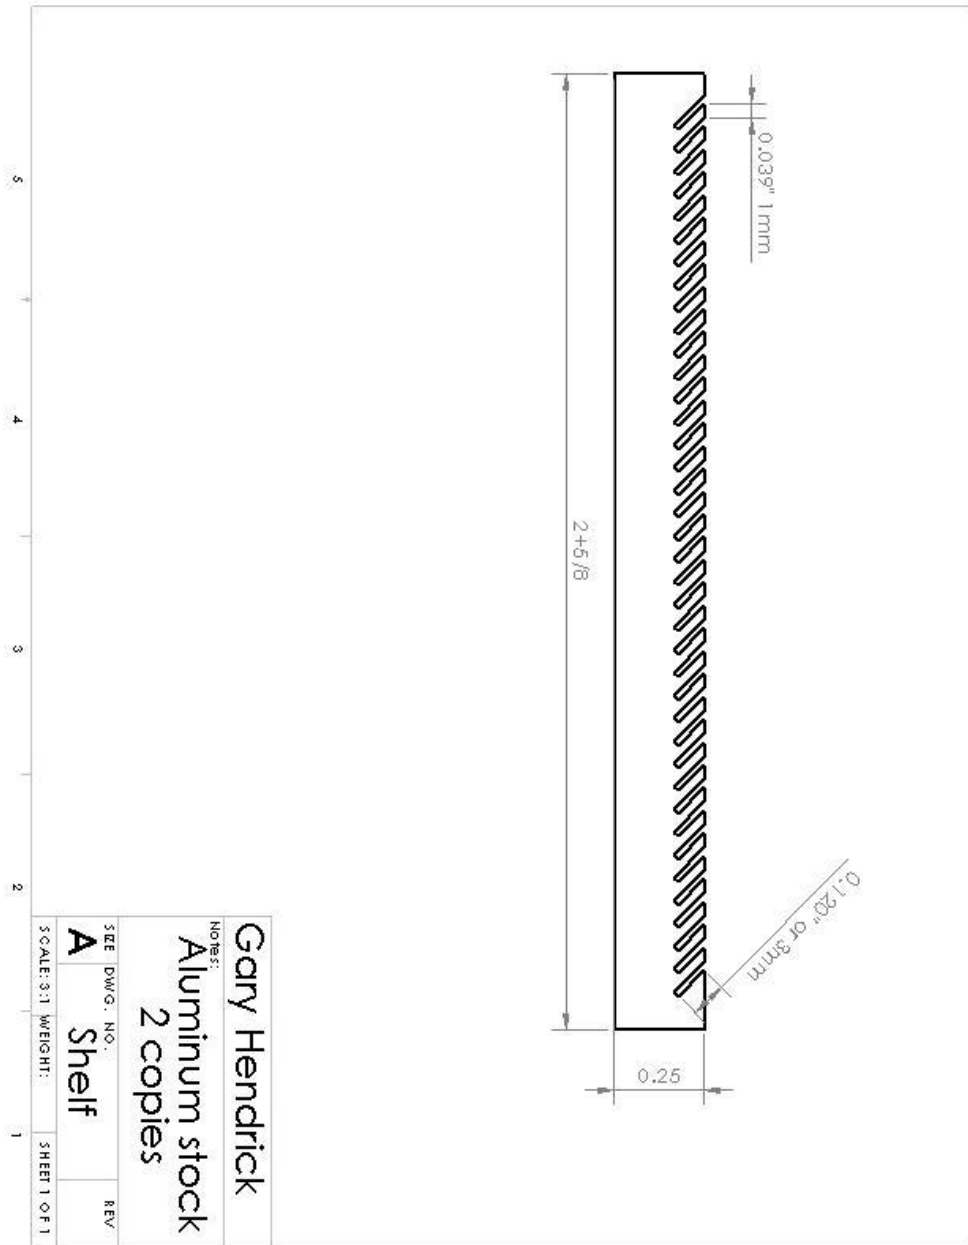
Final design of assembly mount shelves. Two are cut with sawed in slats and finally inserted into the base.
